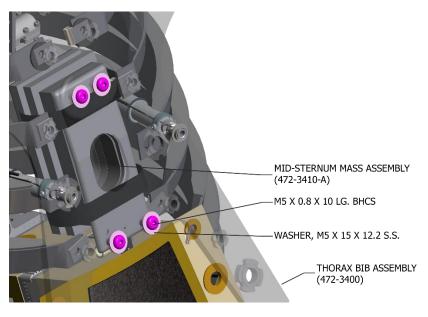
Attach the Mid-Sternum Mass Assembly to the Thorax Bib Assembly
